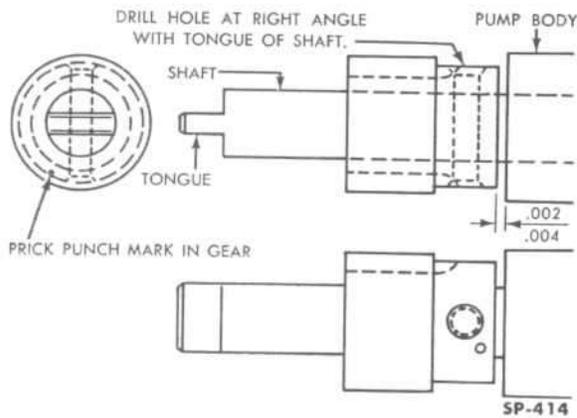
LOCATING CAMSHAFT GEAR ON OIL PUMP SHAFT
